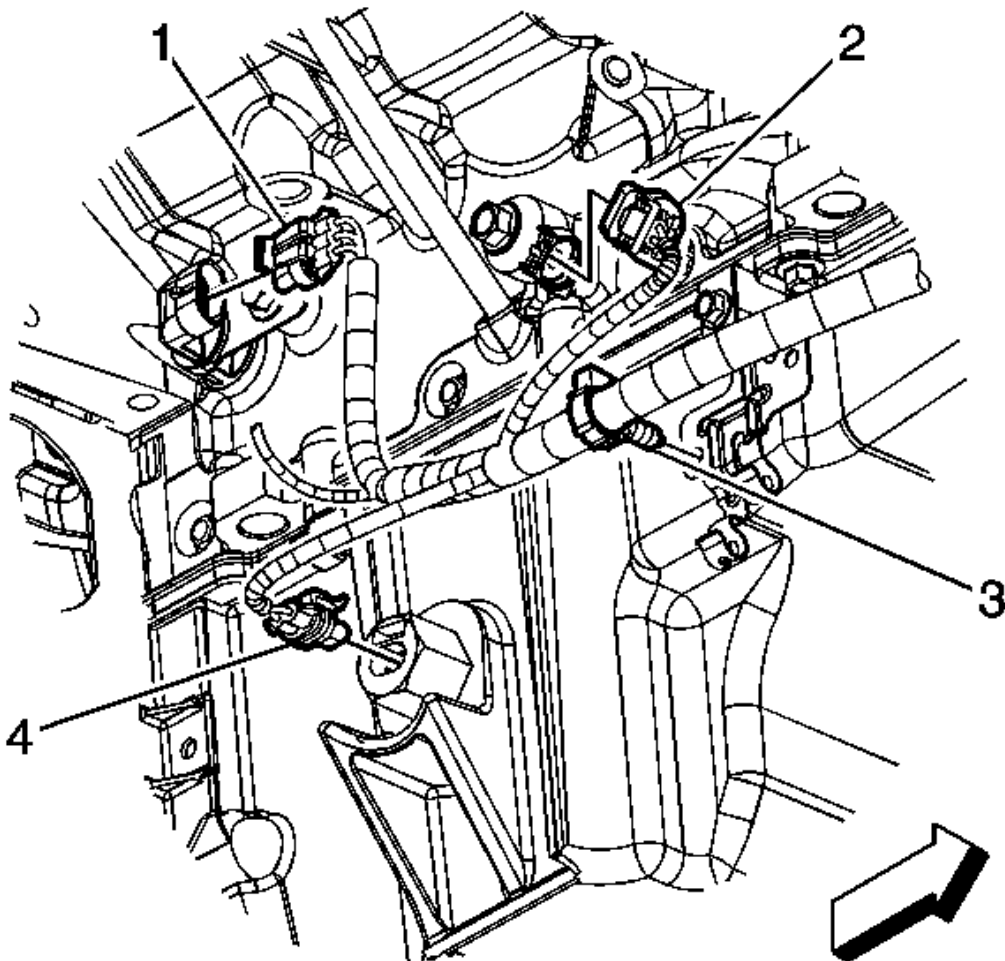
View Of Engine Wiring Harness Electrical Connector & Components
